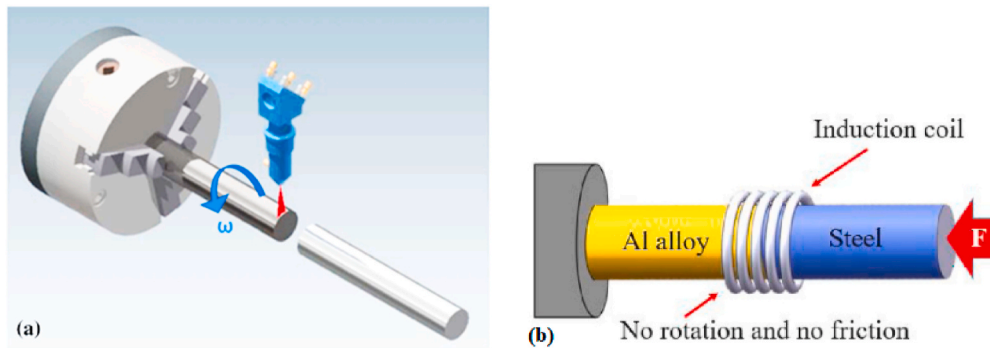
Schematic of (a) laser-assisted friction welding to pre-heat [88], (b) thermal compressive device to post-heat treatment [16].
